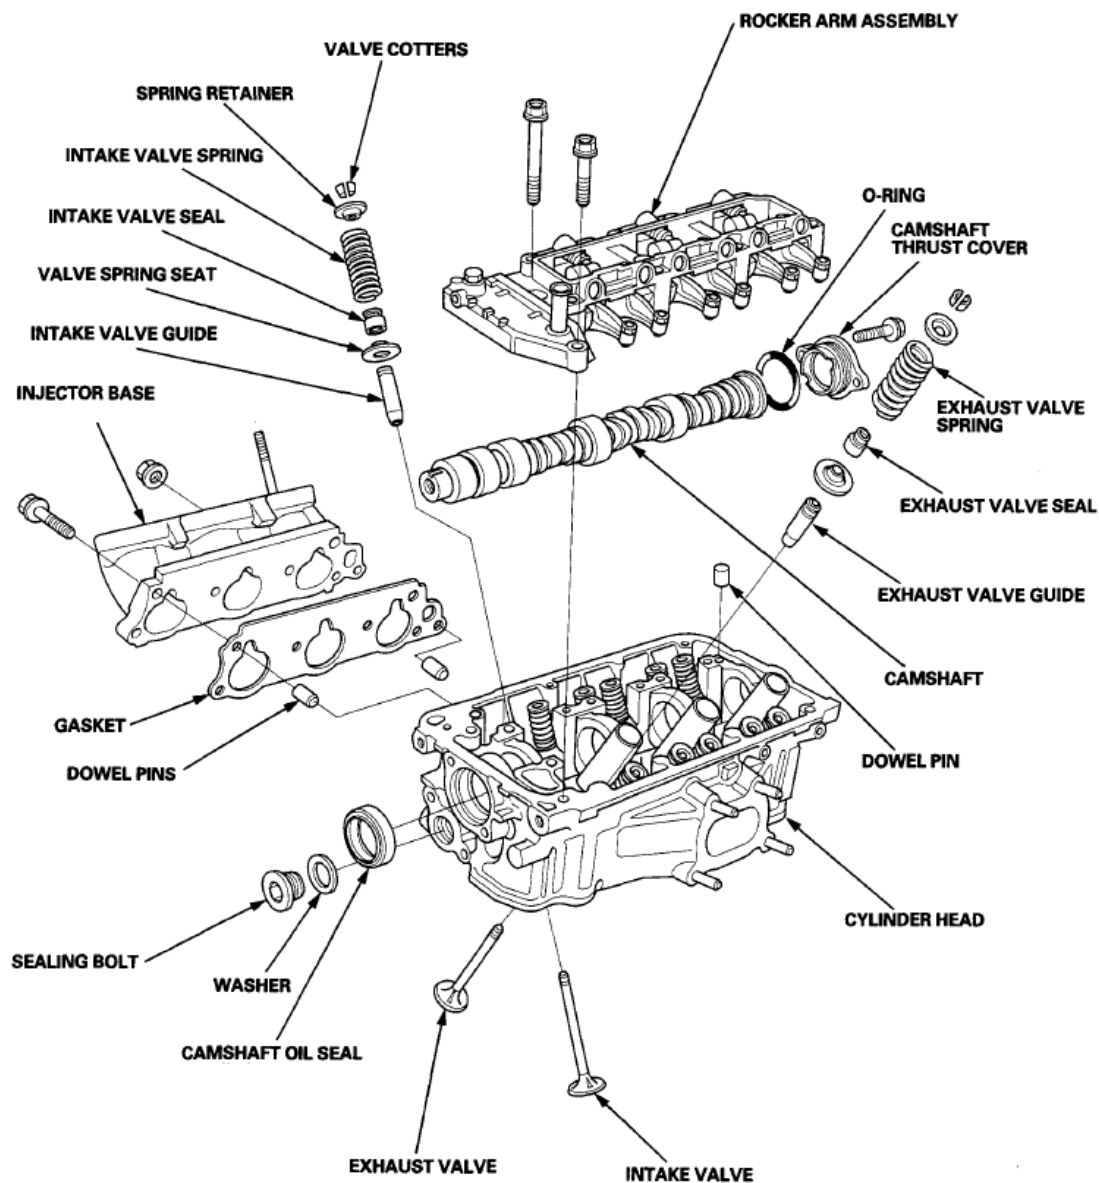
Exploded View Of Cylinder Head - Front Components Location
